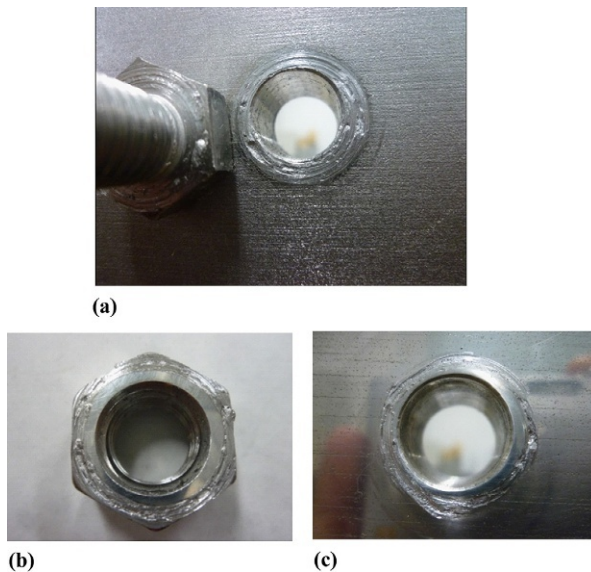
Example of seizure occurring on nut- and bolt head-bearing surfaces and plate surface. (A) Bolt head-bearing surface and plate surface, (B) nut-bearing surface, and (C) plate surface.
